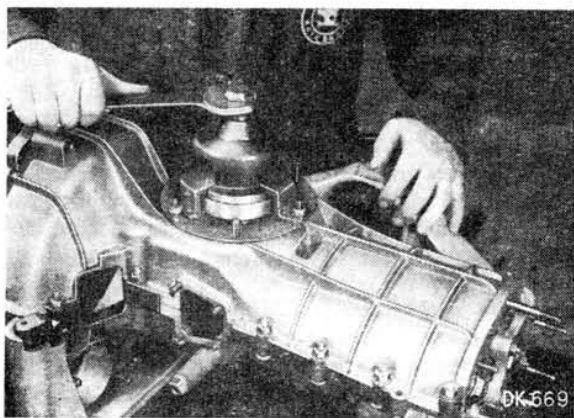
/4 - Press-fitting of Differential Tapered Roller Bearings Using MP 5-107 Jig
